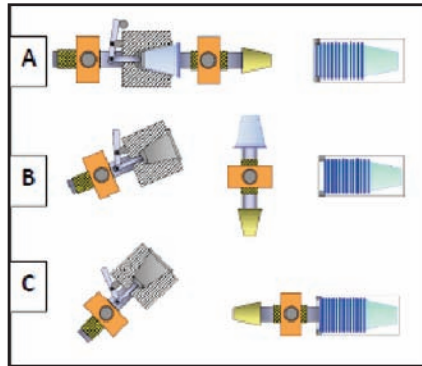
Below sheet line former with trim-in-place, tilt-to-stack feature with 180 degree swing.
